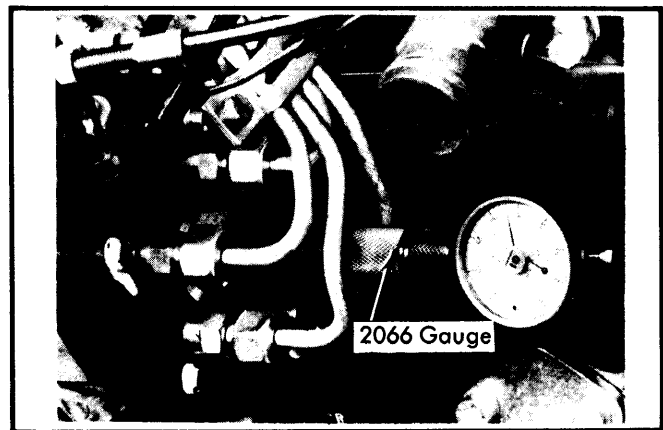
Preloading Injection Pump With Dial Indicator (2066)
